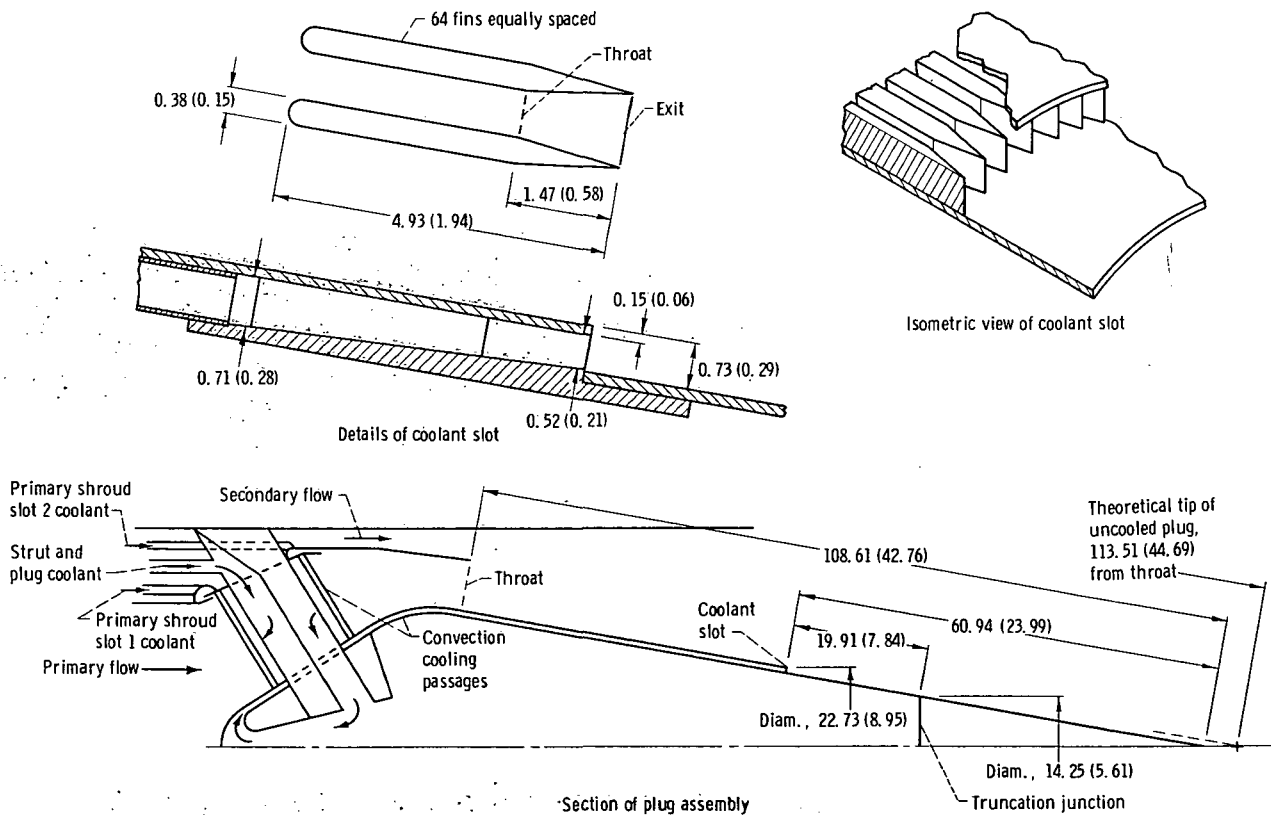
Schematic and details of plug nozzle film cooling design. (All dimensions are in cm (in.).)
